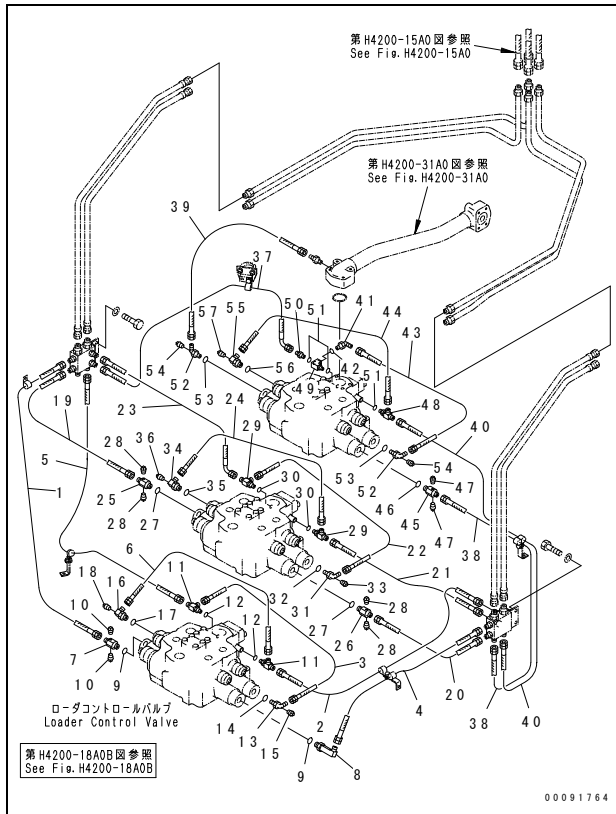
F0038 (PPC VALVE LINE FRONT)
